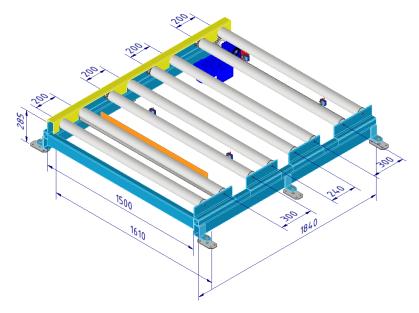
Second roller conveyor of the chain roller conveyor machine that transports pallets. Dimensions in mm.
